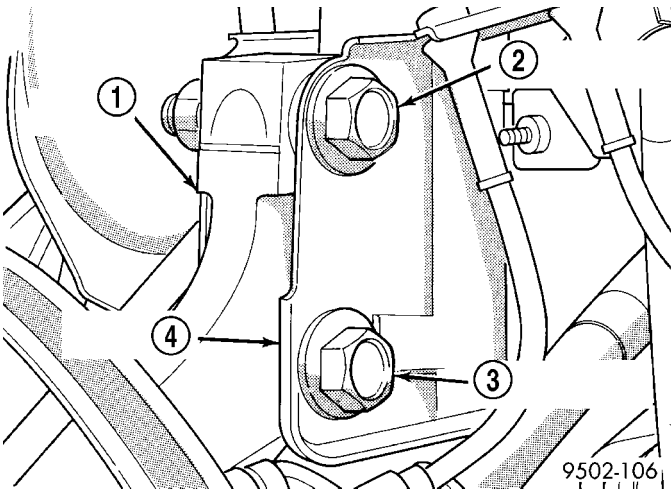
Correctly Installed Eccentric Attaching Bolt
